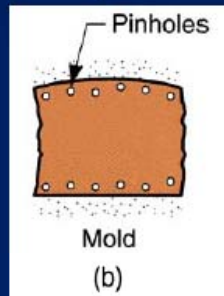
Common defects in sand castings: (b) pin holes
